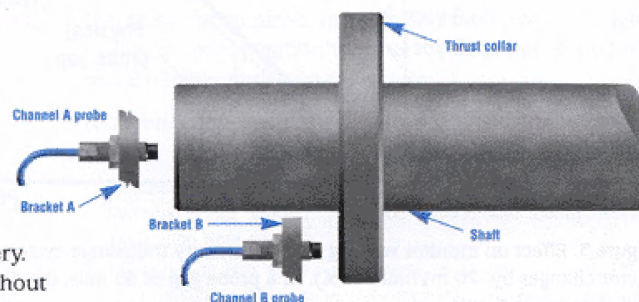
Axial position probes mounted on separate brackets, observing a shaft with non-integral thrust collar.
